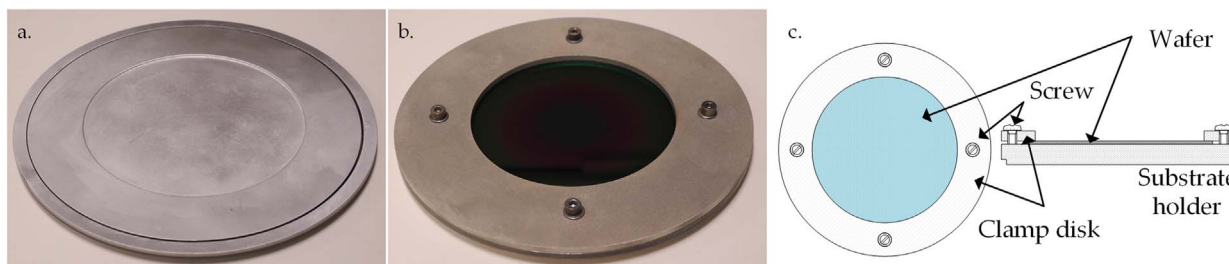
Standard sample holder (a) and tailored substrate holder (b). The sample holder for clamping the wafer consists of a base plate (Al), a clamping disk (Al) and fixing screws made of stainless steel (c).
